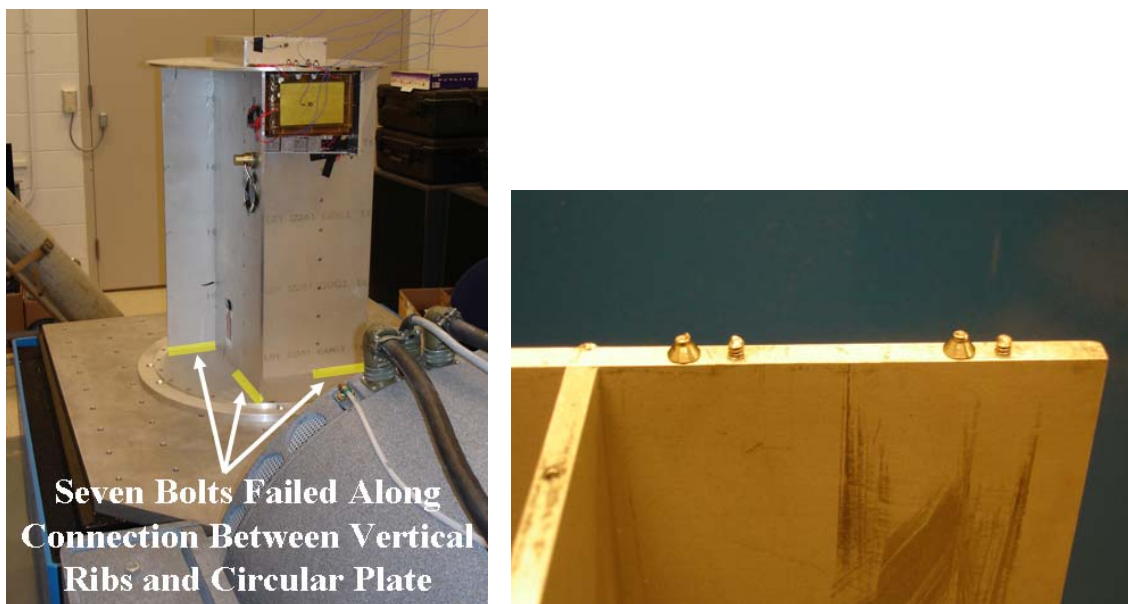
Location of Sheared Bolts and Close-up of Damage
